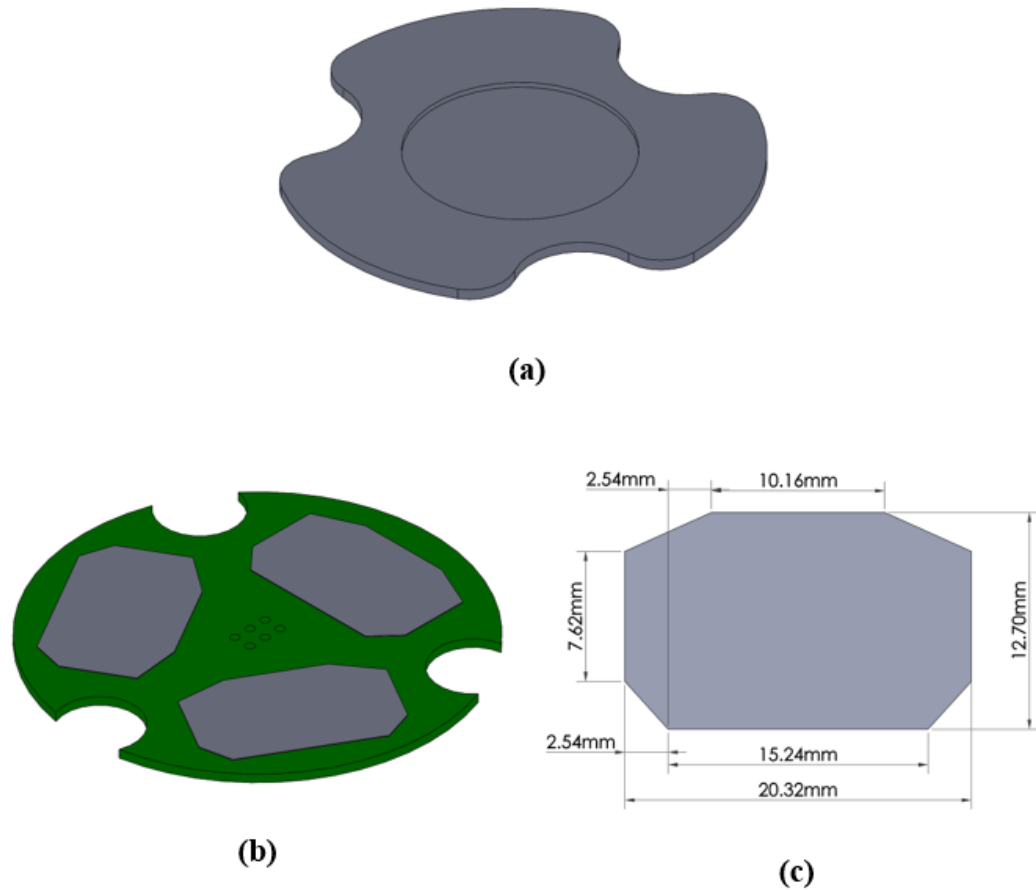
Measuring element of the sensor (a) ground electrode, (b) charged electrode printed circuit board, and (c) dimensions of the charged electrodes
